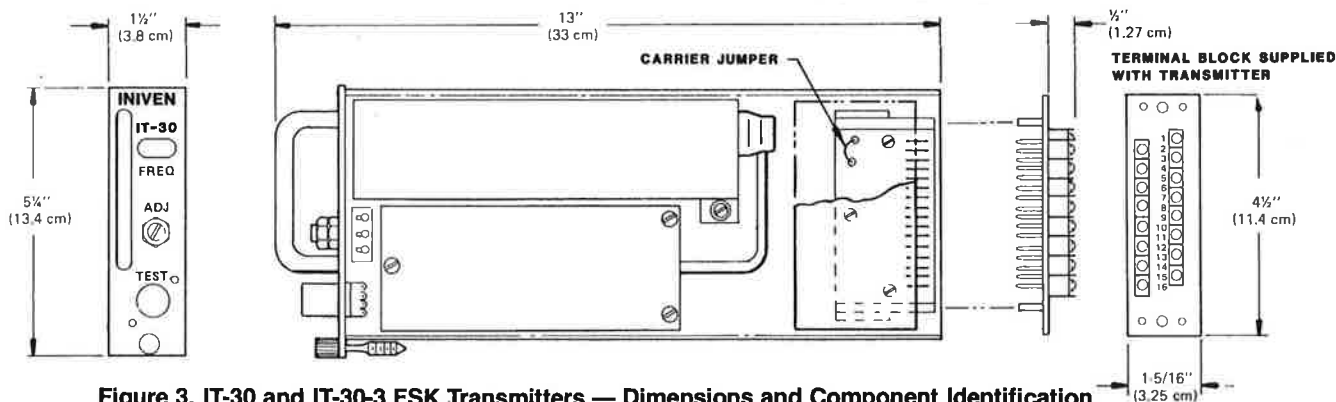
IT-30 and IT-30-3 FSK Transmitters — Dimensions and Component Identification
